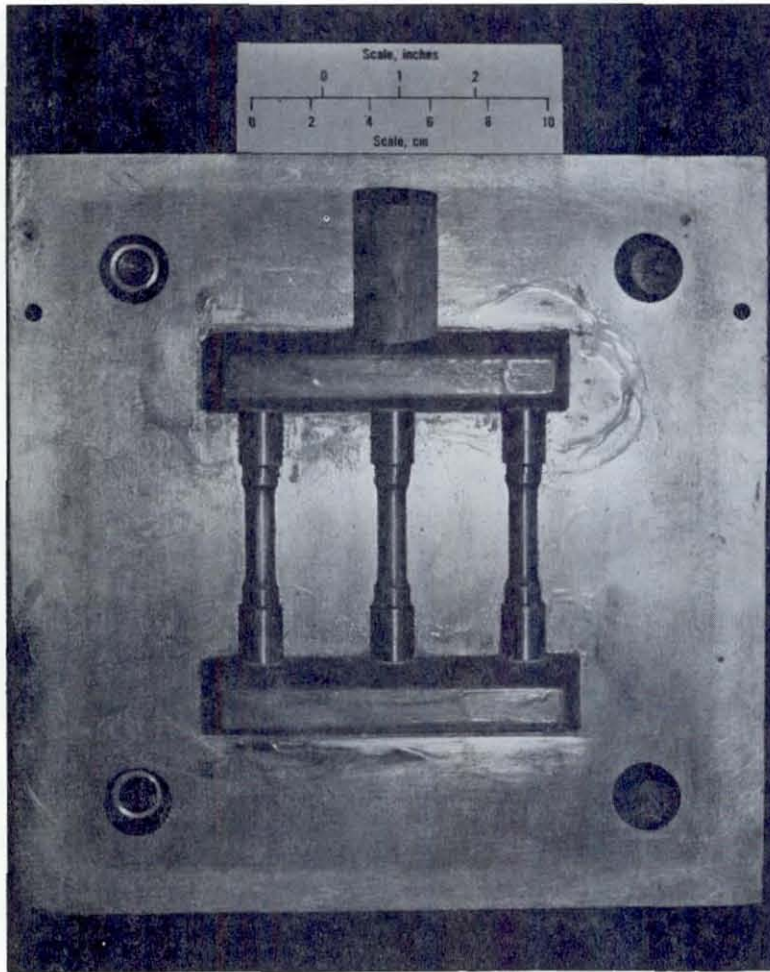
Shell molding pattern for 1/4-inch test bars.
